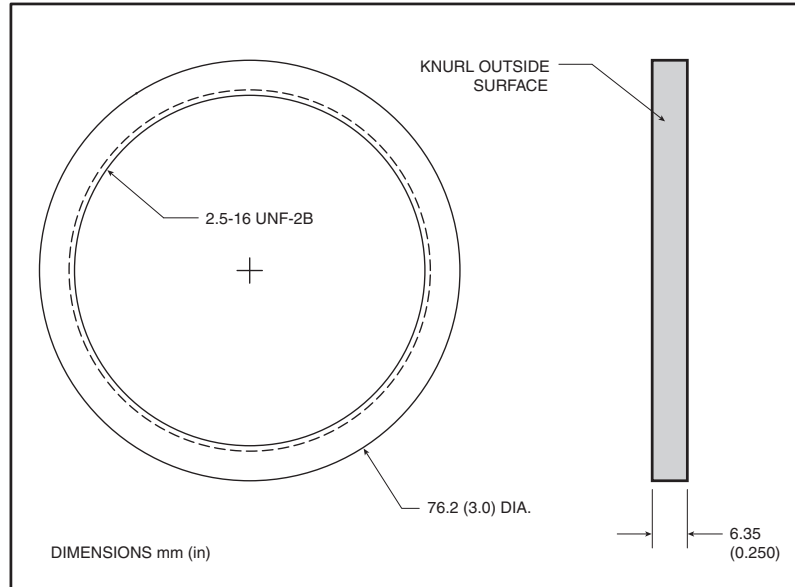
General Dimensions, Mounting Nut for the Transmitter
